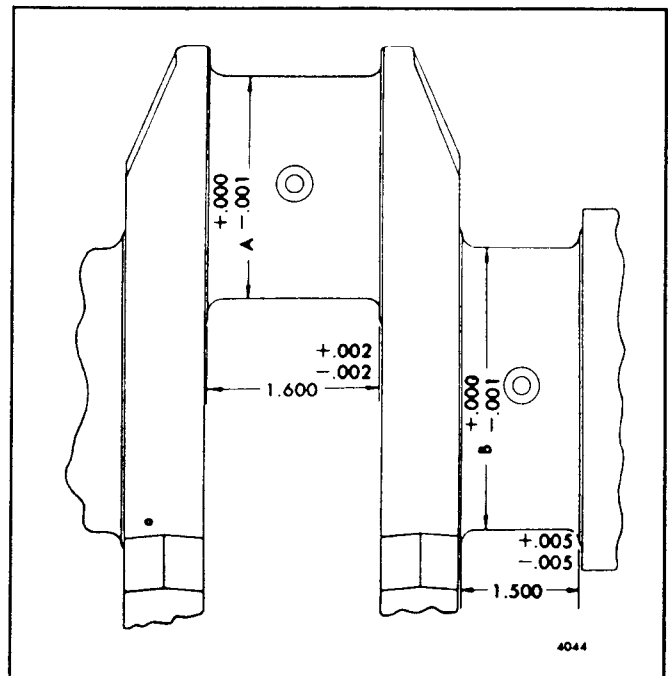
Dimensions of Crankshaft Journals - In-line Engine
